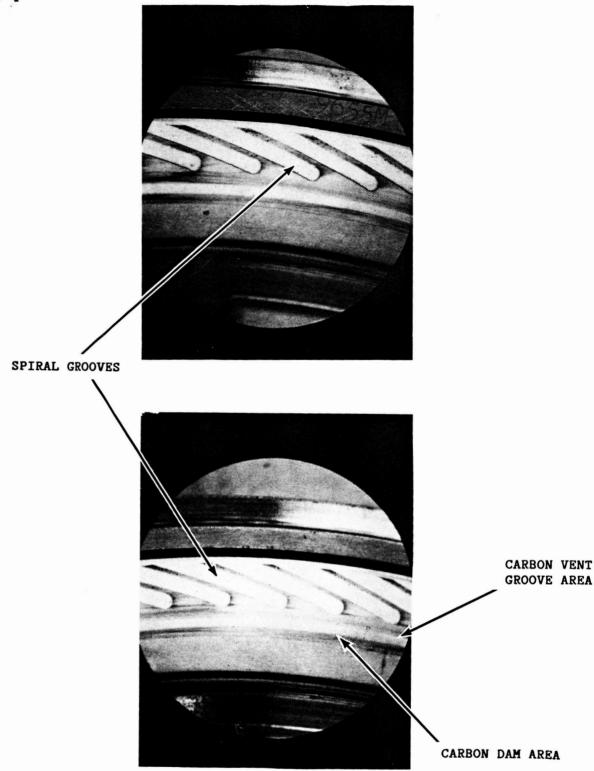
Spiral Groove Gas Bearings, After Build 23.
